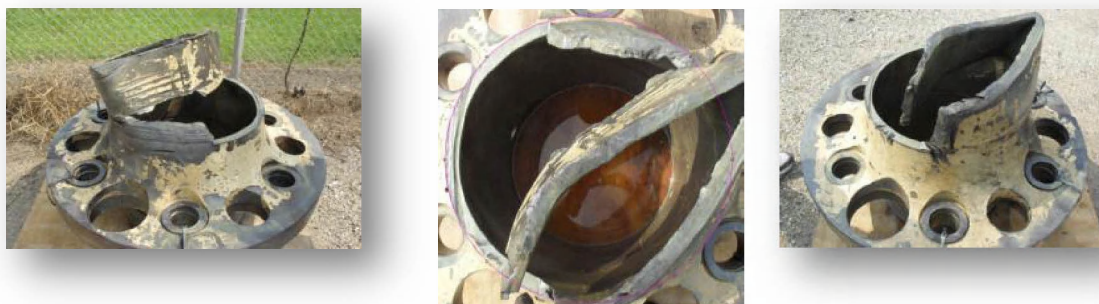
Riser flange images, side view (left), top view (middle), side view (right).
